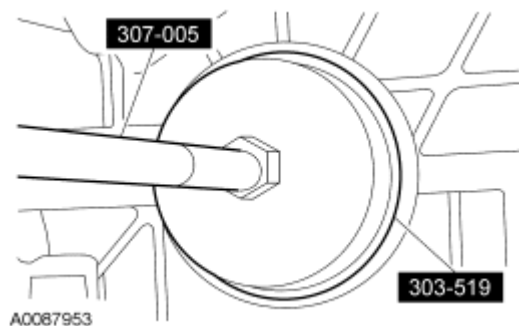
Identifying Special Tools (307-005 And 303-519)
